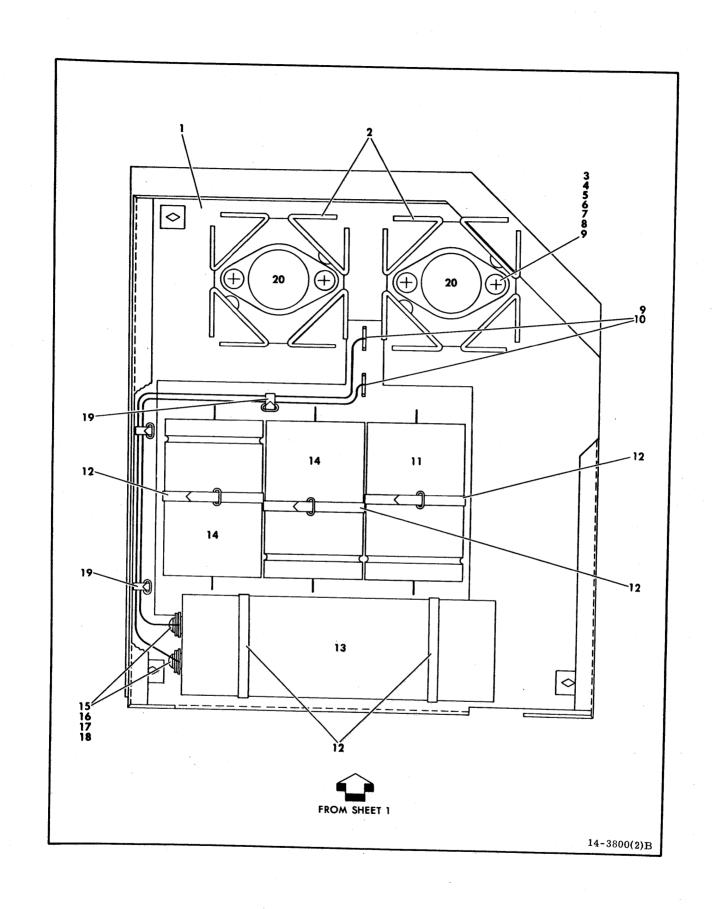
Component assembly, Type XKV (Sheet 2)
